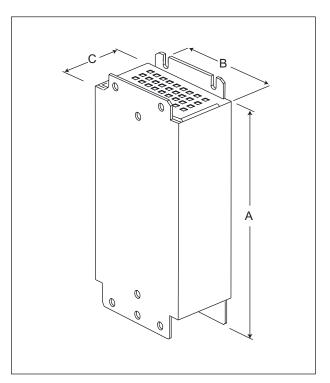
Dimension drawing: Motor reactor, frame size FSA
